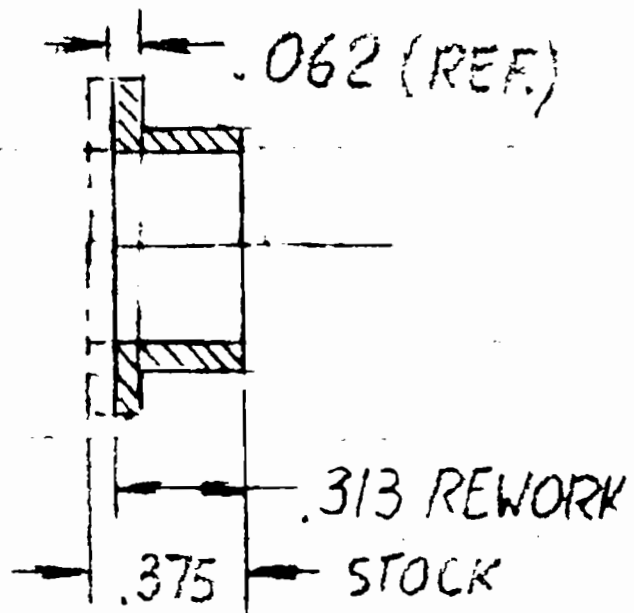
DETAIL OF MACHINING OF SEAT RAIL EXTRUSION - 23
